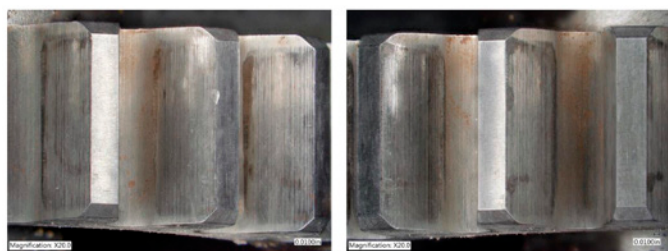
Generator Spur Gear (Gear #3) showing typical wear seen at overhaul.
